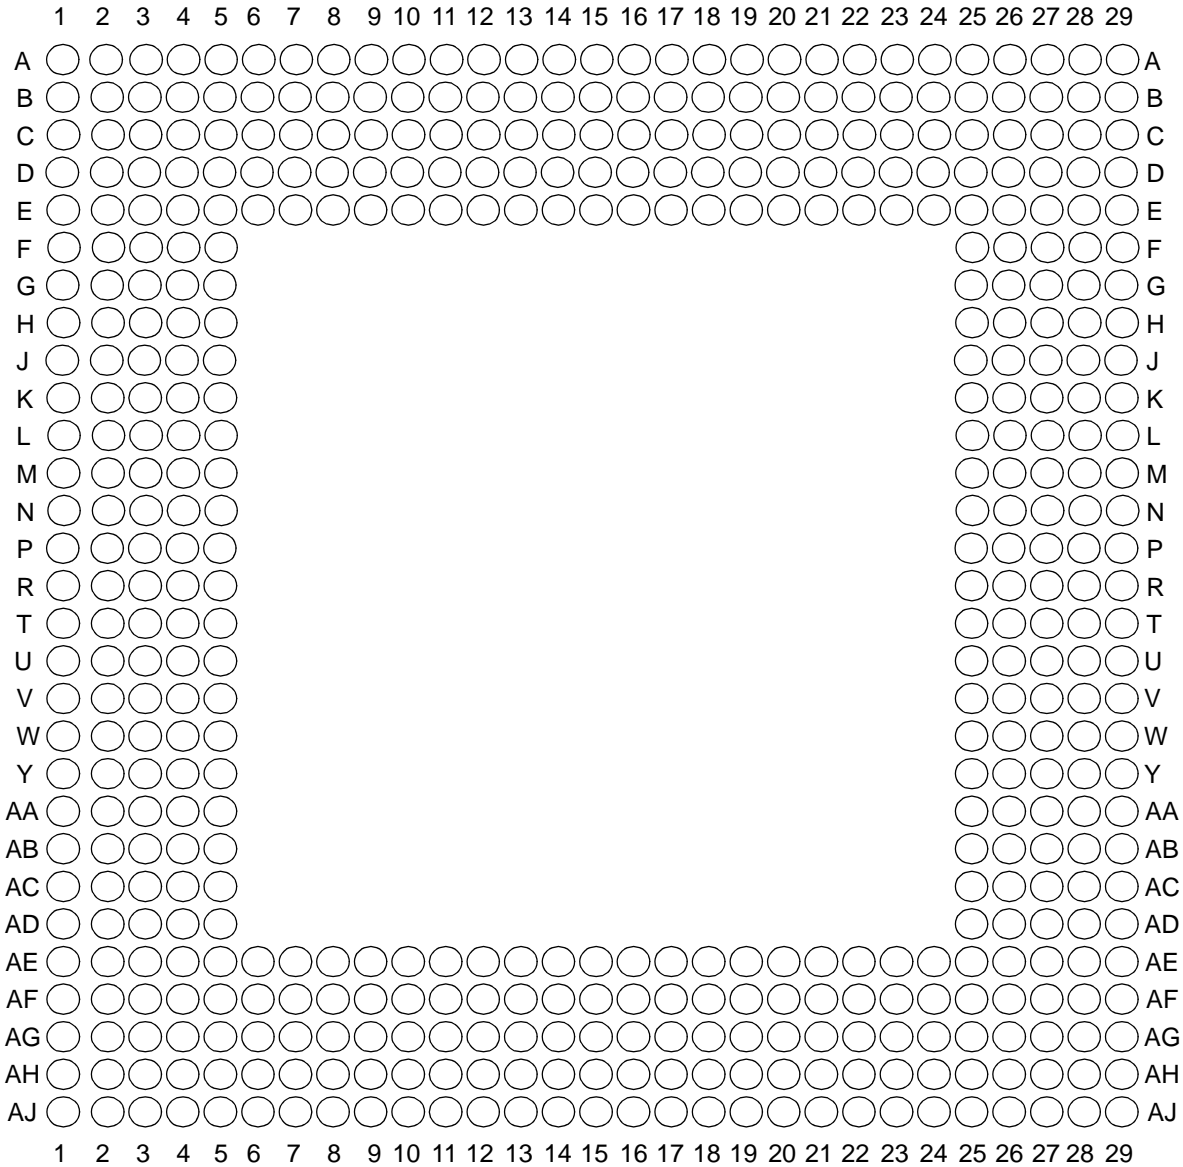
Pinout of the 480 TBGA Package as Viewed from the Top Surface
